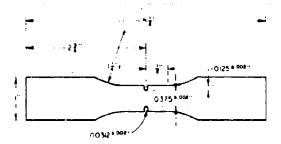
NOTCHED SHEET FATIGUE SPECIMEN
